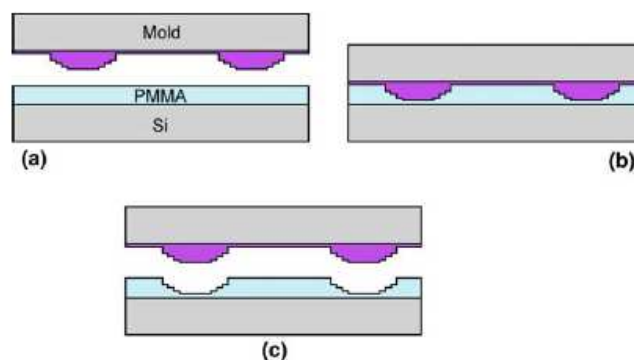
NIL process using a 3D mold (a) substrate coated in thermo plastic polymer. (b) imprinting of mold into substrate under heat and pressure . (c) mold removed after cooling and imprint remains in substrate [15].
